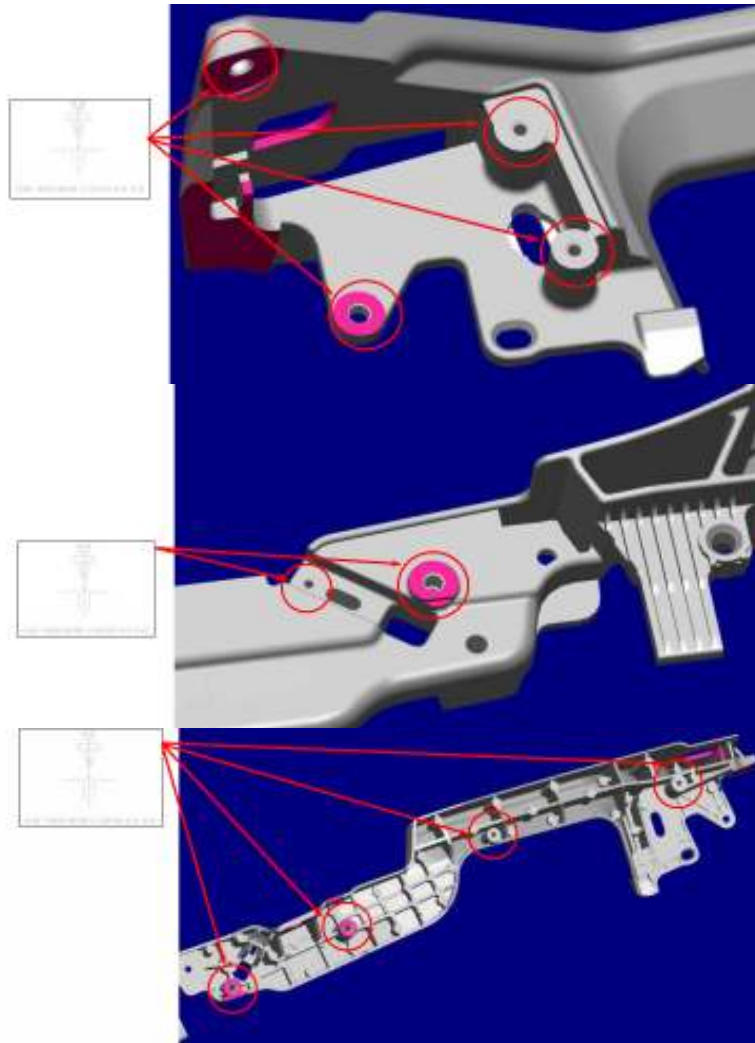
protected threads. Plugs have been inserted before coating.
